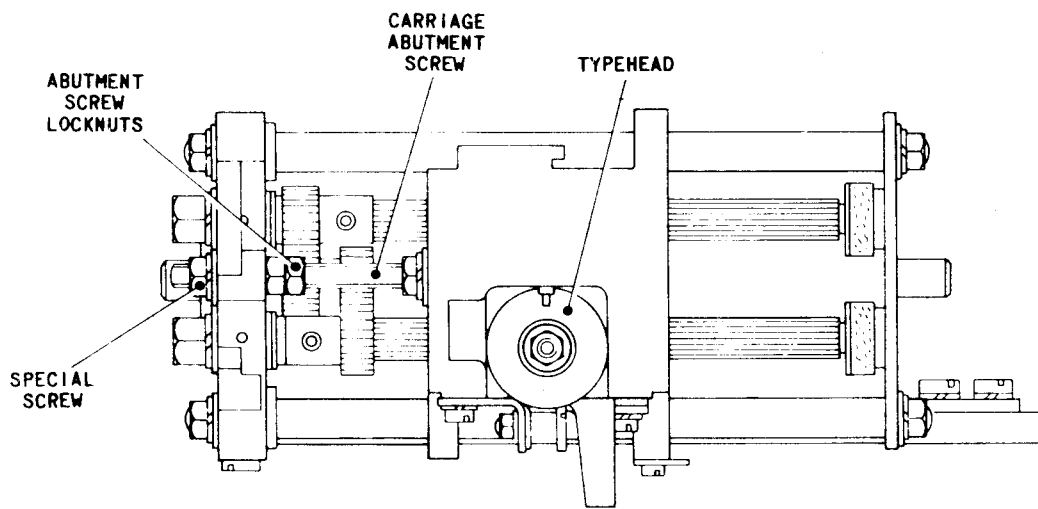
TYPEHEAD CARRIAGE MECHANISM
